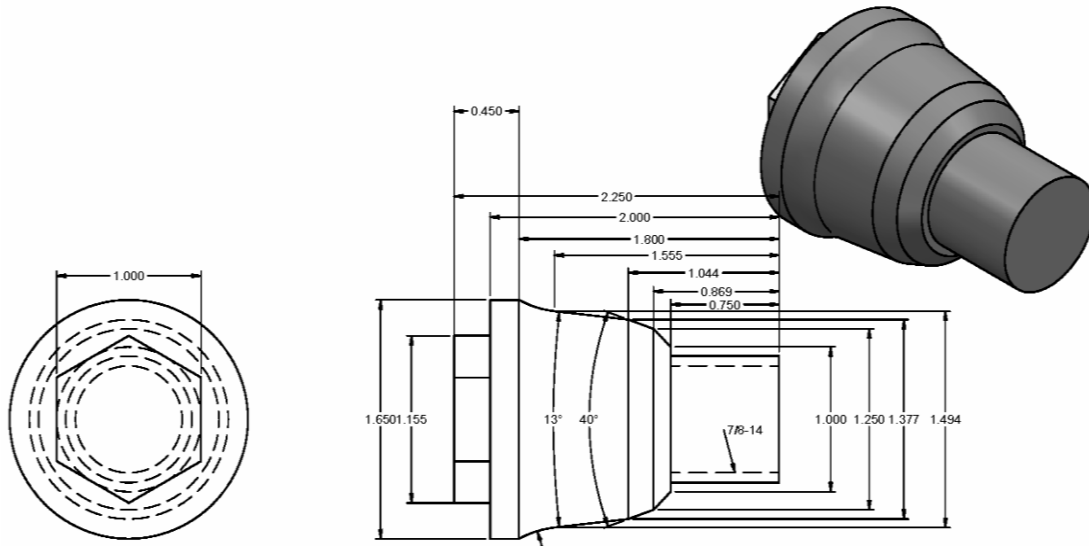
The details of the plug used in the experiment (the dimension is in inches).
